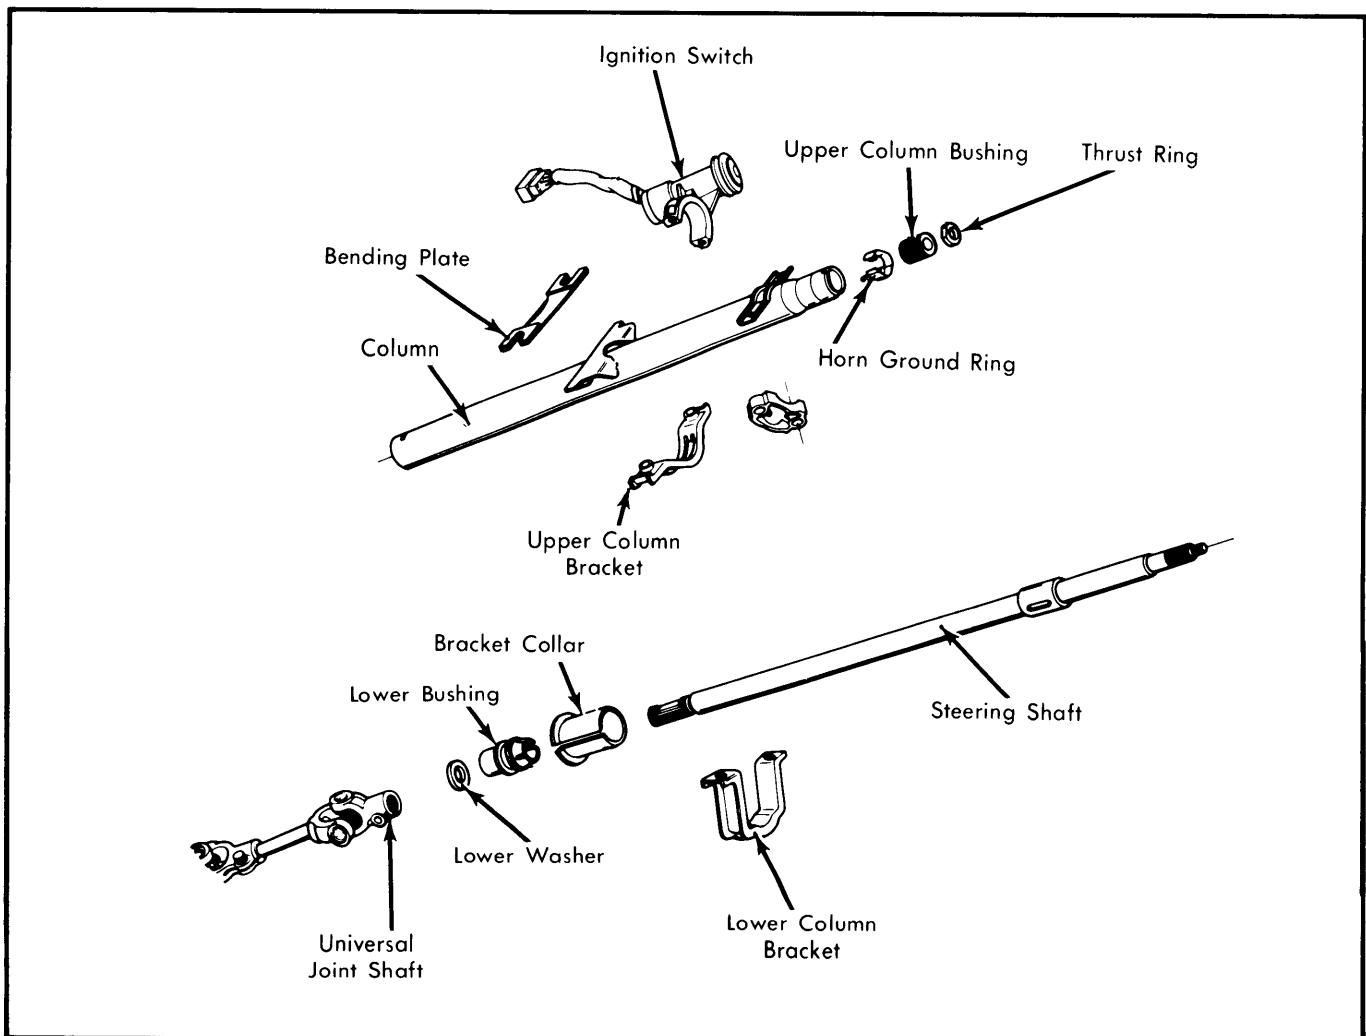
Exploded View of Civic Steering Column (CVCC Similar)
